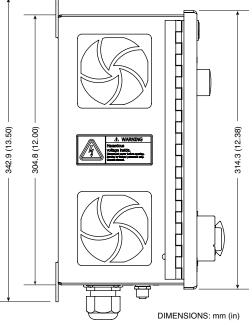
CNi-CB120 & CNi-CB240 Mounting Dimensions (Side View)
